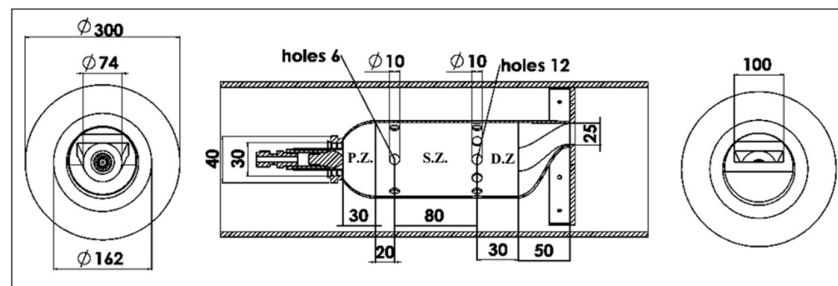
Cross-sectional view of the combustor and its dimensions [14]
